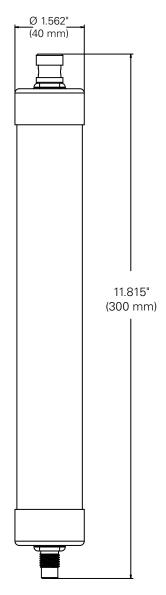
Dimensional illustration of fused loadbreak elbow connector current-limiting fuse.
